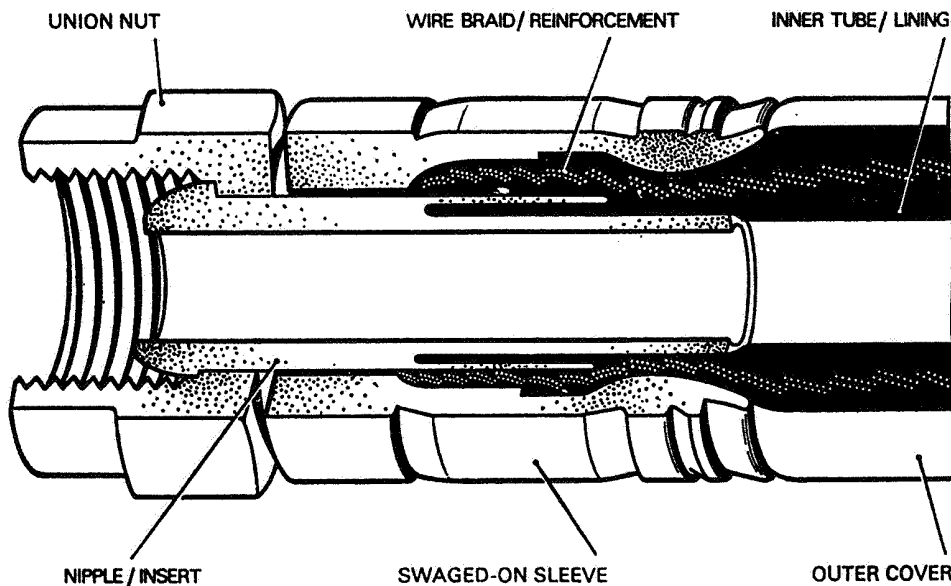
HIGH PRESSURE HOSE ASSEMBLY
